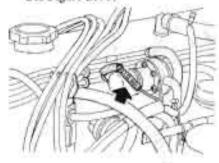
Disconnecting wire for throttle opener solenoid
